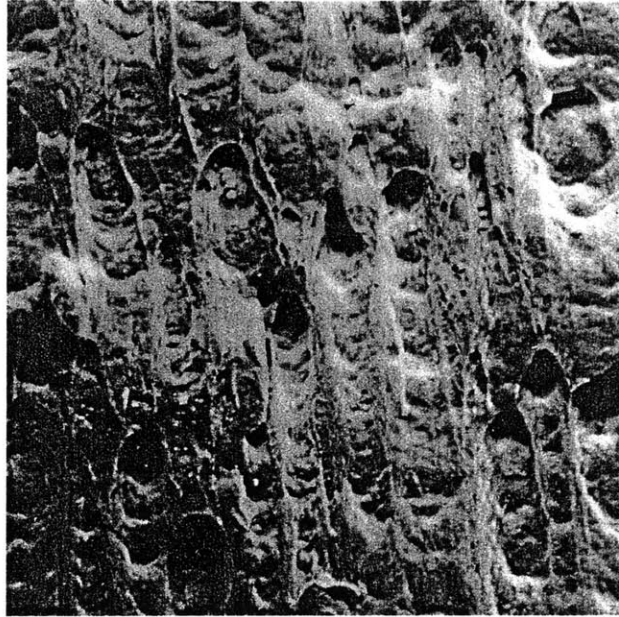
Fracture surface of specimen fracture at pressure of 300 MPa, tensile strength of this copper is 235 MPa
